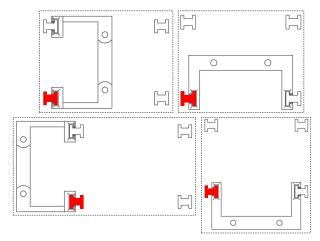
Quad-directional mounting about a single rail (highlighted in red)
